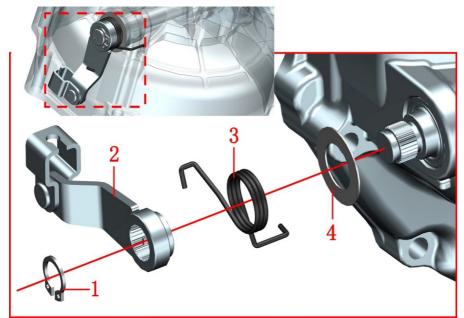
RIGHT CRANKCASE COVER ASSEMBLY		ZT158MJ right crankcase cover assembly-3	CHK	(0)
